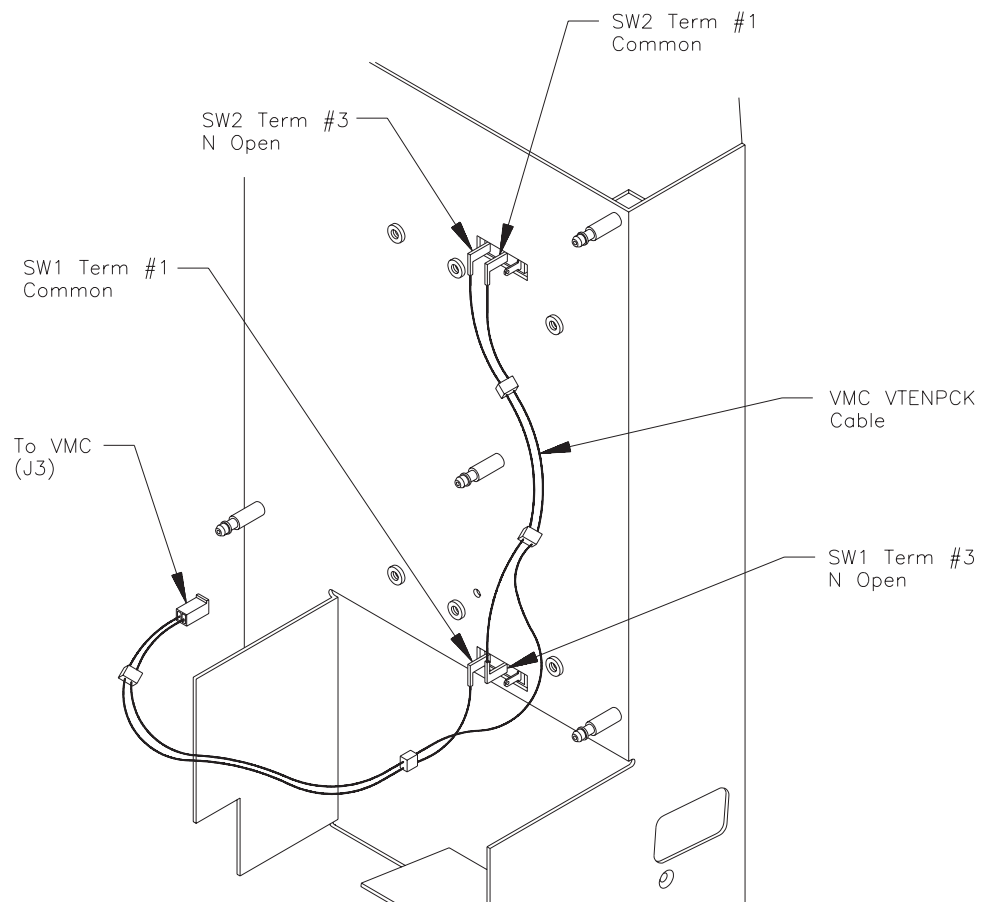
VMC VTENPCK cable and connector labels (rear view of the chassis wall)
